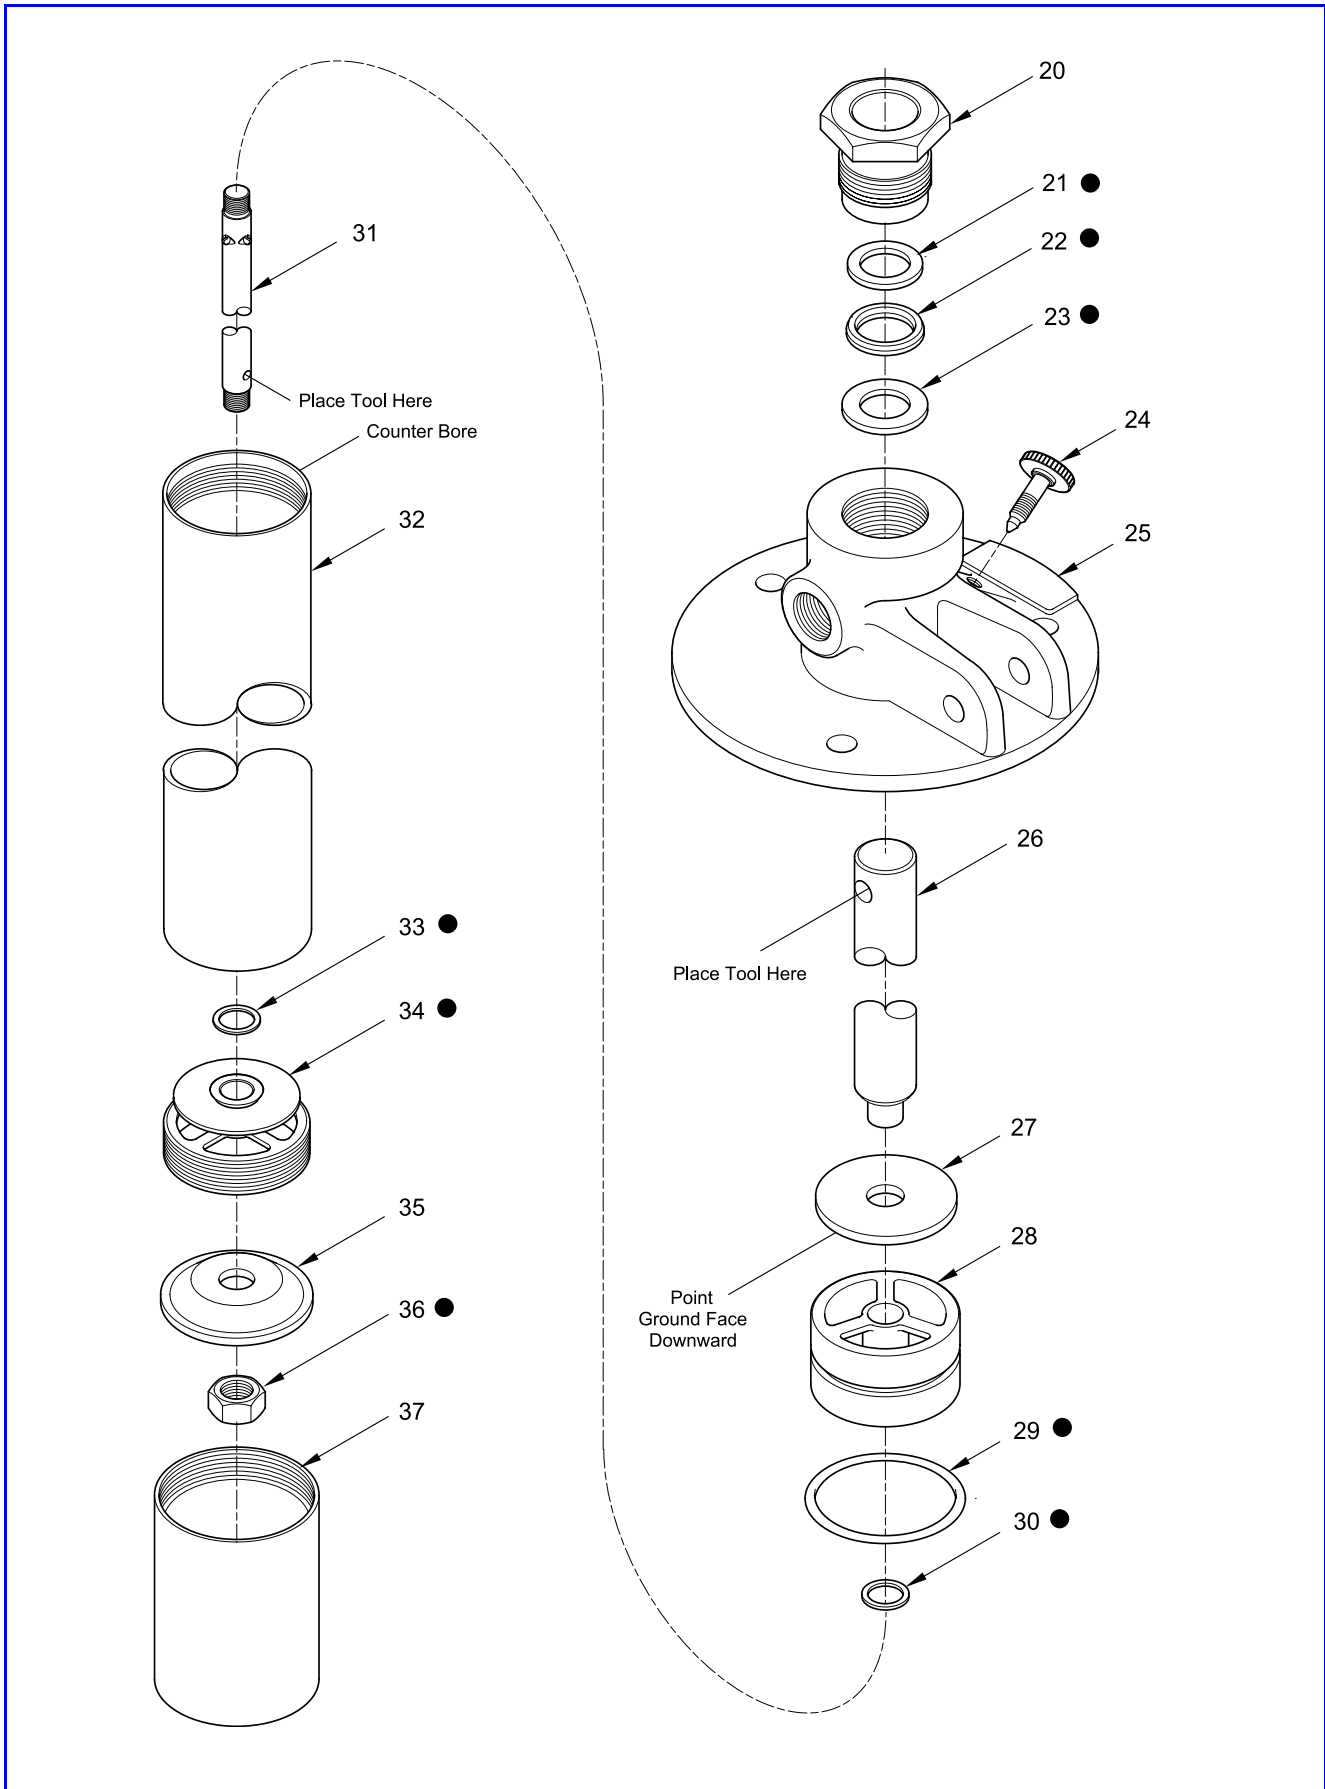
Pump Tube Assembly for Model 7181 Series - Exploded View
